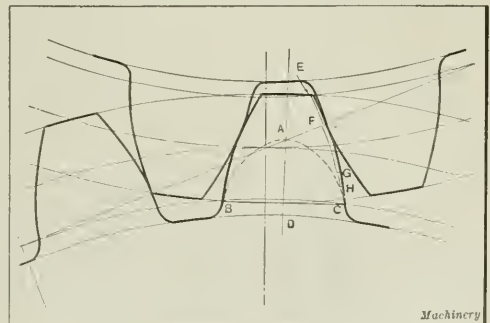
Spiral Bevel Miter Gear, 15 Teeth, 20-degree Pressure Angle
